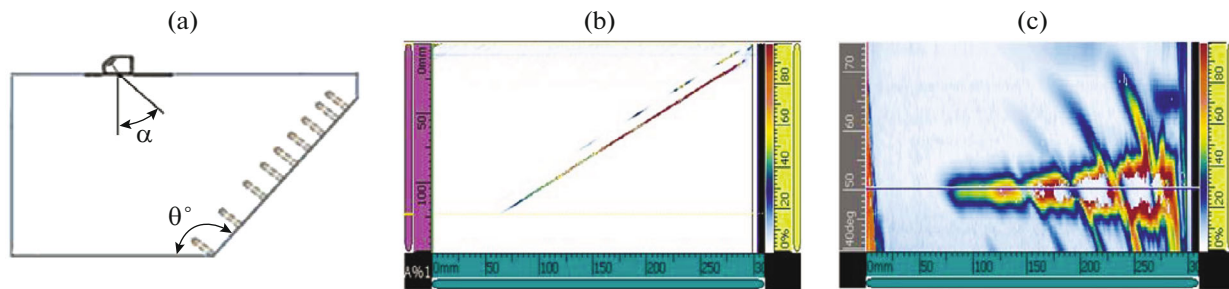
Result of scanning a sample with flat-bottomed holes: (a) layout of flat-bottomed holes, (b) B-scan, (c) C-scan [58].
